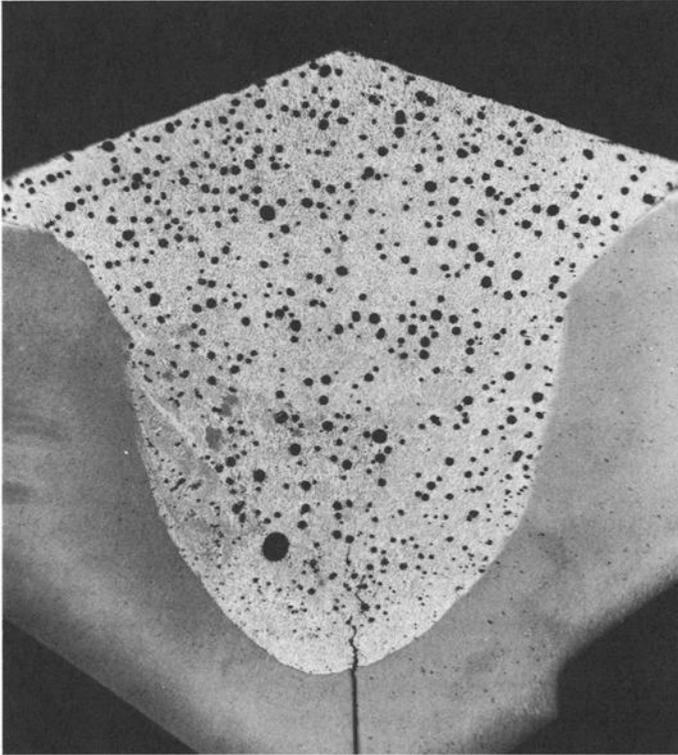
Cross section of weld joint in beryllium fracture Specimen 617-3 showing excessive porosity and root crack in the aluminum weld deposit (as polished, $\times 20$).
